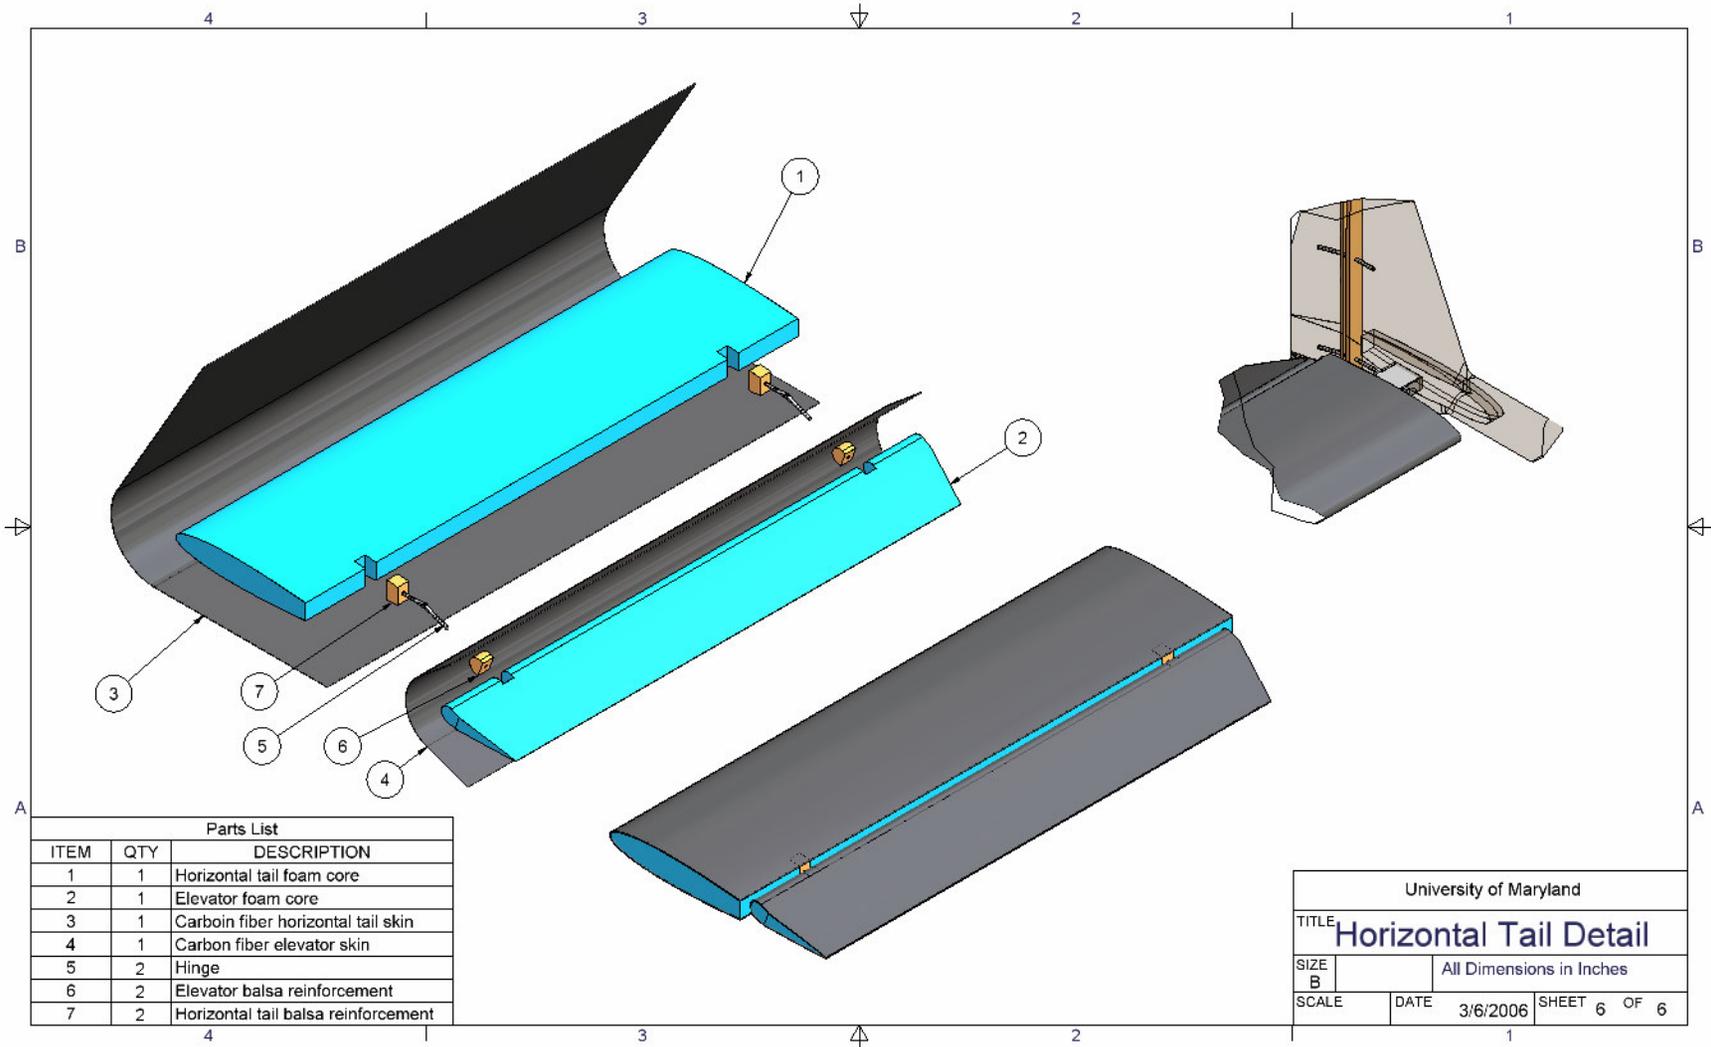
Detailed CAD Drawing – elevator assembly and mounting.
